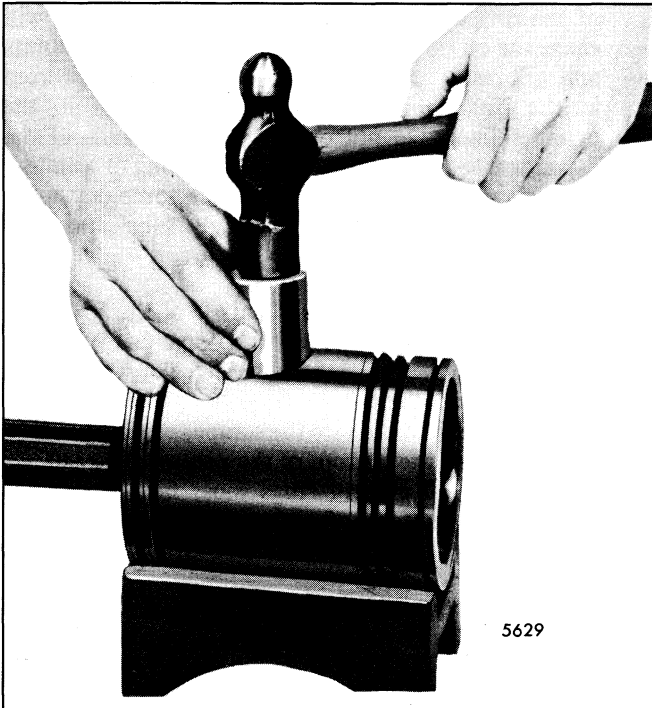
Installing Piston Pin Retainer using Tool J 24274-B
